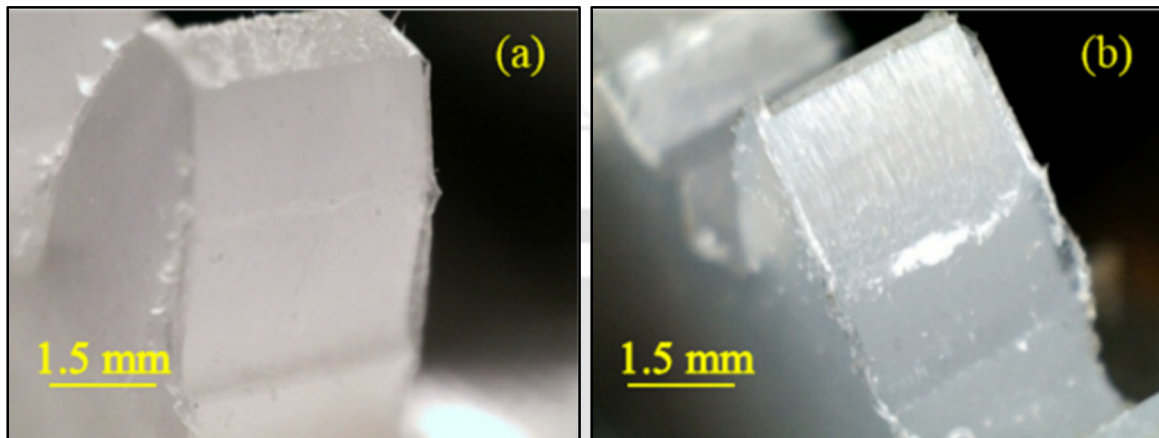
Worn out gear tooth surface of (a) symmetric gear and (b) asymmetric gear after 1.45×10^5 cycles, 2 Nm
